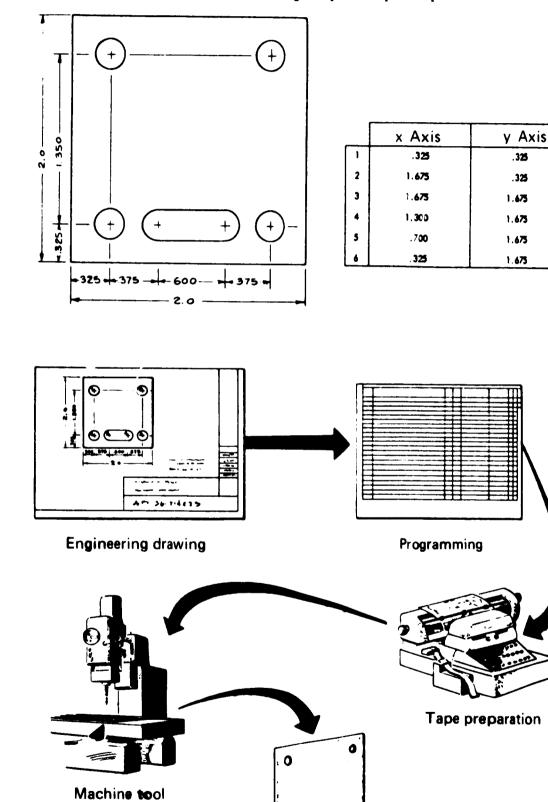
Figure XIV. The sequence of manufacturing of a part on a point-to-point NC machine tool
